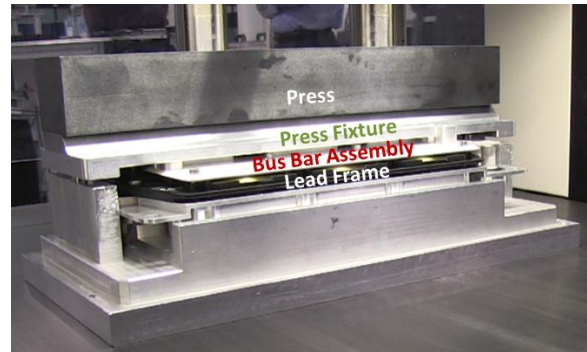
Pressing Bus Bar Assembly onto Lead Frame.
